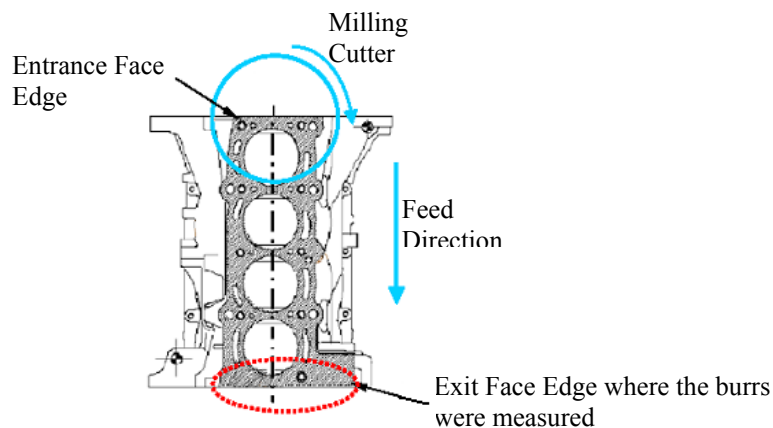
Top view of the engine block illustrating the edge where the burrs were controlled (Souza Jr, 2001)
